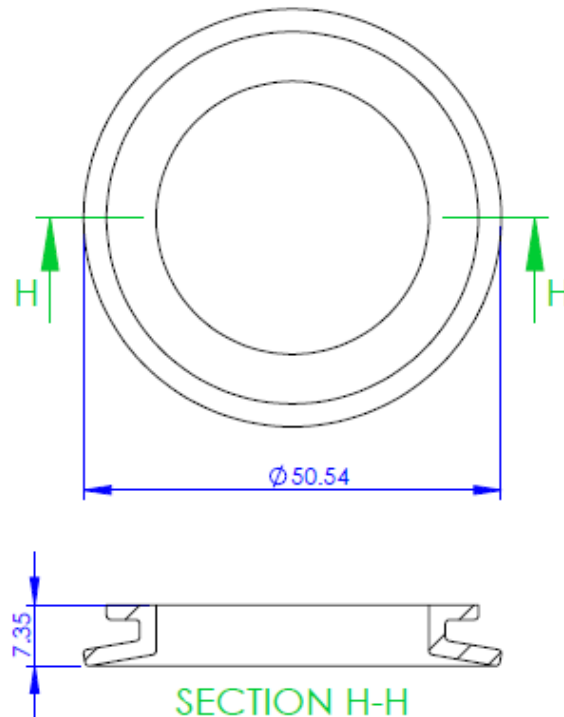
Diagram and dimensions of the SWITCH - Carb Cap Silicone Seal. All dimensions are in mm.
